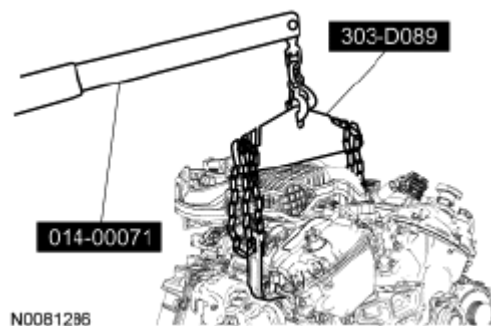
Identifying Heavy Duty Floor Crane And Spreader Bar
